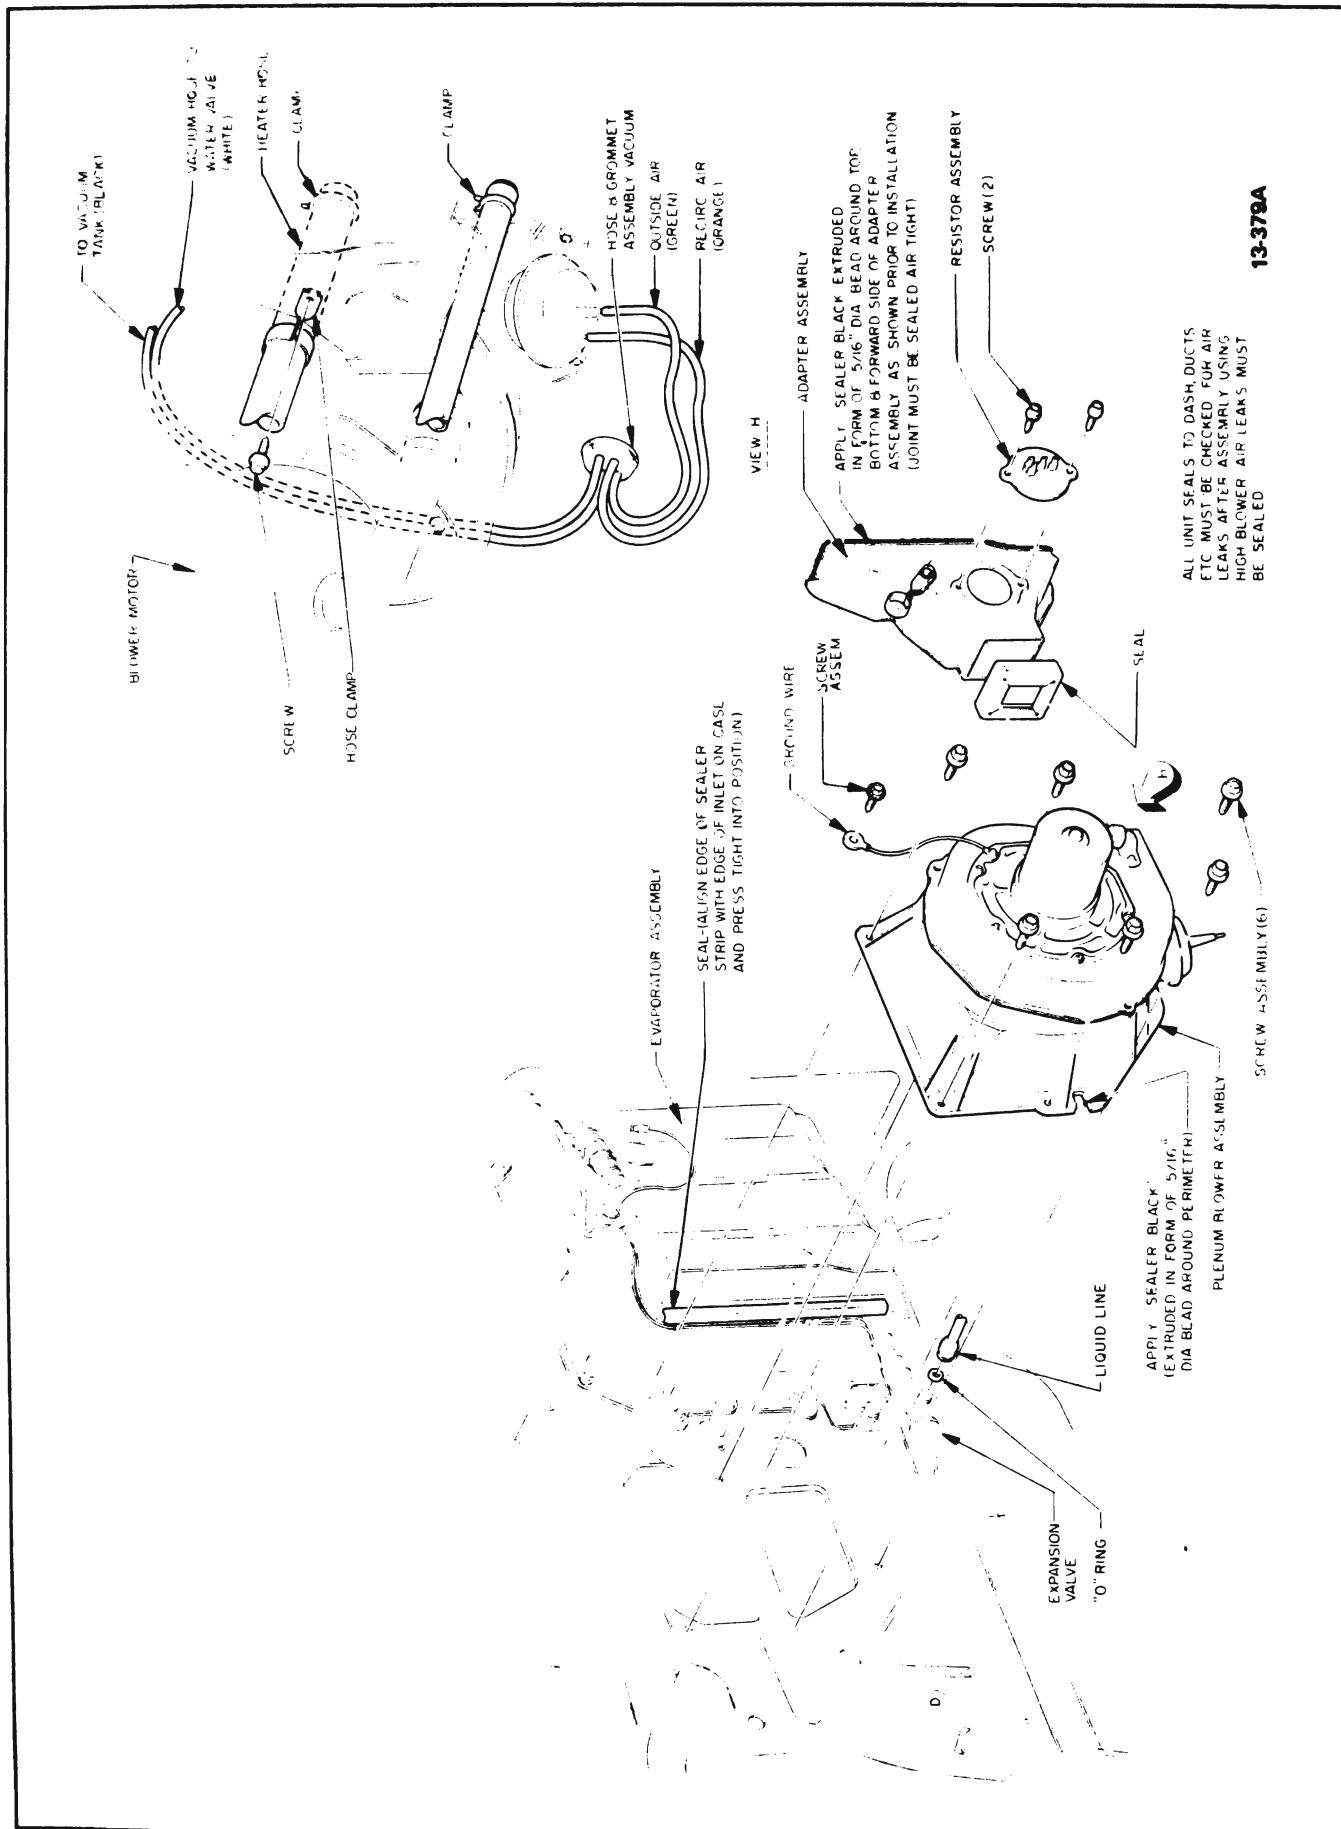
Plenum Blower Assembly and Adapter, 45-46-48000 Series
